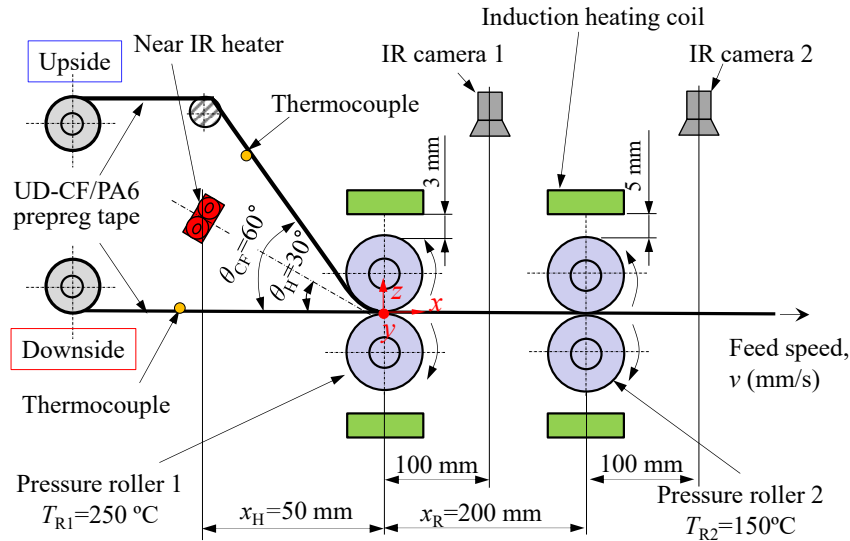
Appearance of CFRTP continuous laminate molding machine using double rollers.
